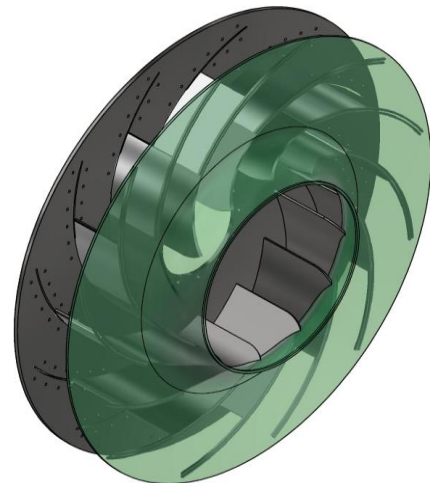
Geometrical model of the centrifugal fan impeller with the movable blade in minimal position
